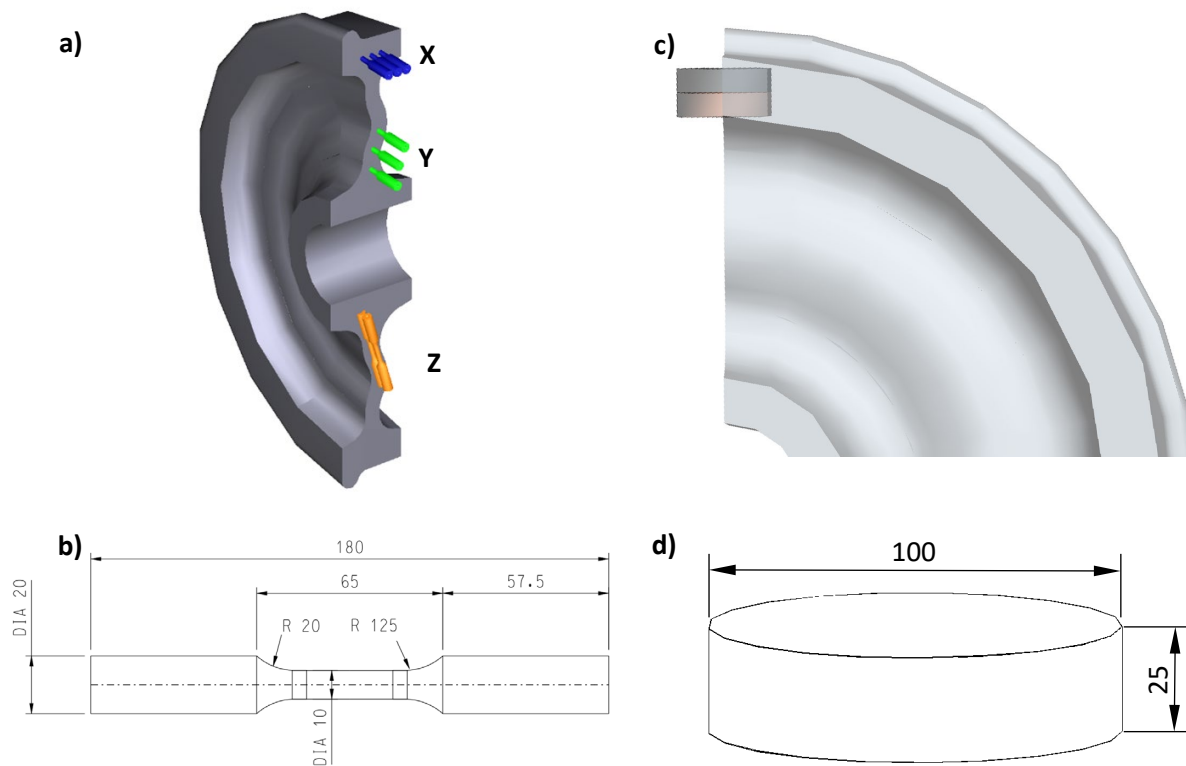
a) TMF sample locations. Distinction is made between rim samples (X), circumferential web samples (Y) and radial web samples (Z). (b) Standard test bar geometry (c) Position where the build plates were taken from the wheel rim. (d) Machined size of each build plate.
